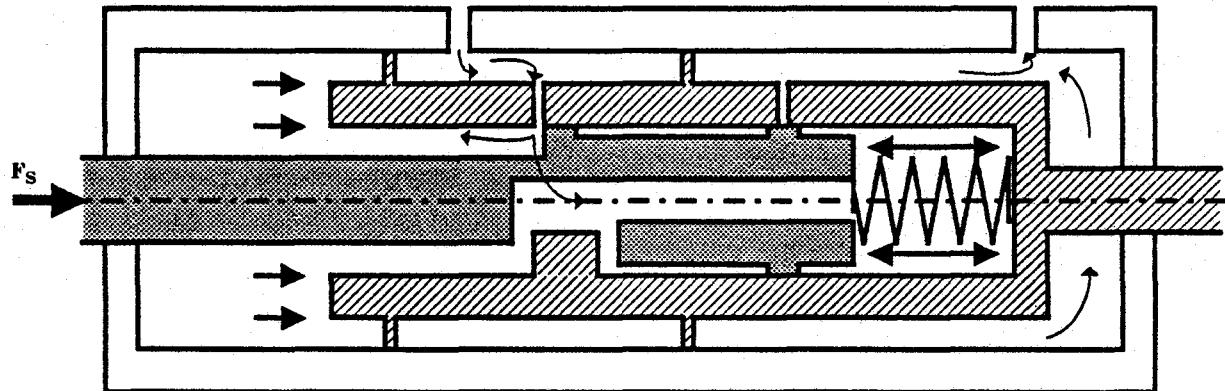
SPOOL VALVE DURING BRAKE RELEASE
